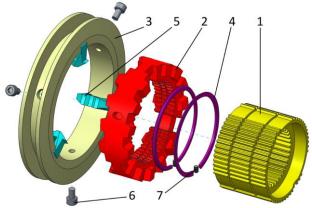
Dog clutch with blocking mechanism – exploded view [11] 1 – hub; 2 – sliding dog; 3 – gearshift sleeve; 4 – blocking rings; 5 – gearshift stones; 6 – gearshift pins; 7 – detent pins
